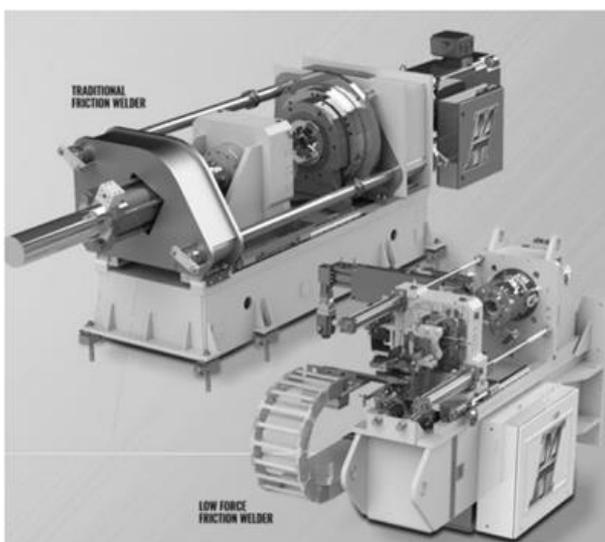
MTI Rotary Friction Welder and Low Pressure Welder [28]
